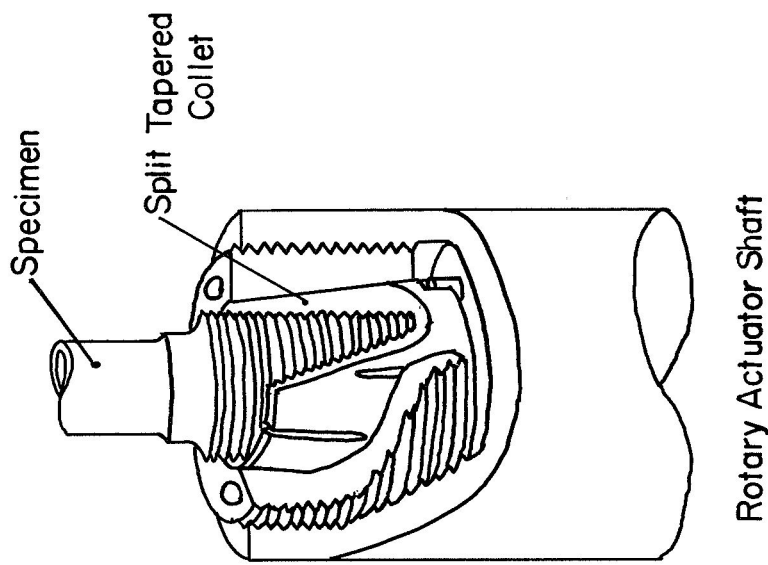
Torsional Specimen Grip Using a Split Tapered Collet
